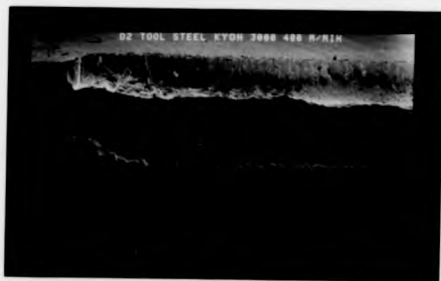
Showing erosion of the tool materials at the primary cutting edge, crater wear and flank face wear
